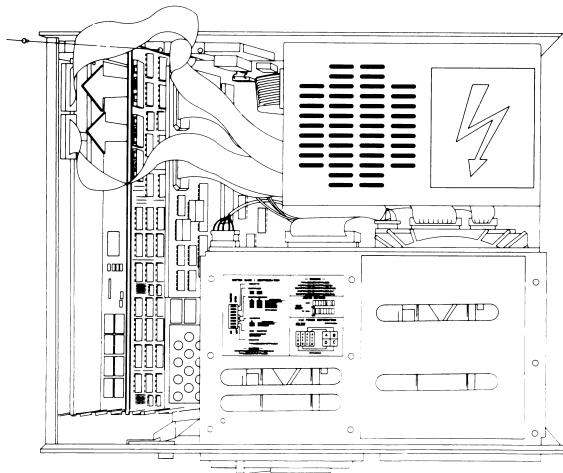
Removing the Fixed Disk Drive Controller Board Signal Cables.
